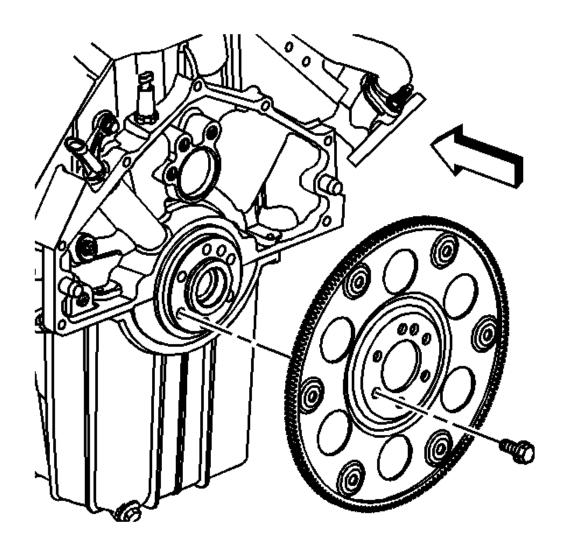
View Of Engine Flywheel & Bolts Courtesy of GENERAL MOTORS CORP.
